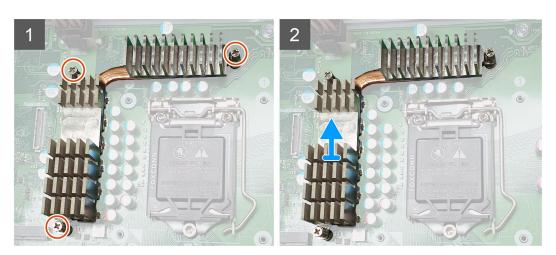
VR heatsink assembly for systems shipped with 125 W CPU
